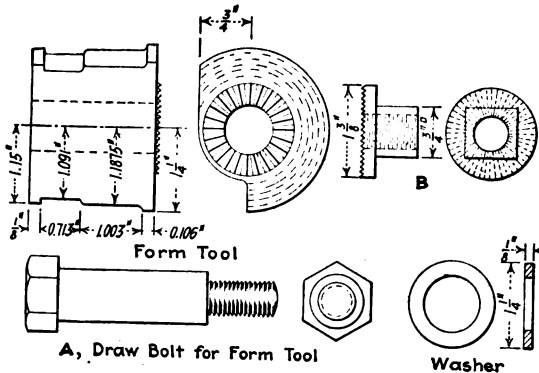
DETAILS OF FORM TOOL FOR NO. 4 ADAPTERS
